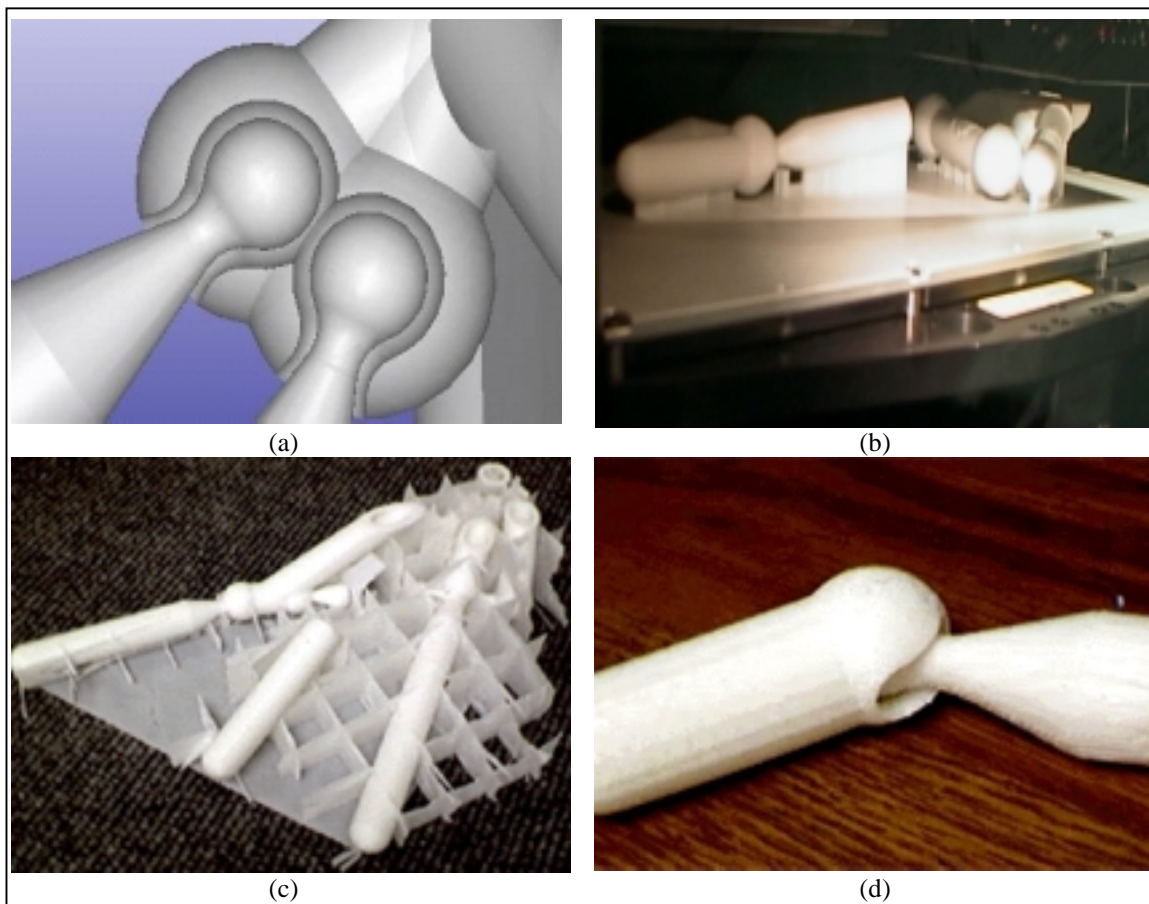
Physical embodiment process: (a) Automatically fleshed joints in virtual space, (b) physical replication process in a rapid prototyping machine that build the three dimensional morphology layer after layer, (c) pre-assembled body in mid print, (d) a close-up image of a joint printed as a single unit. Note ball is printed inside the socket.
